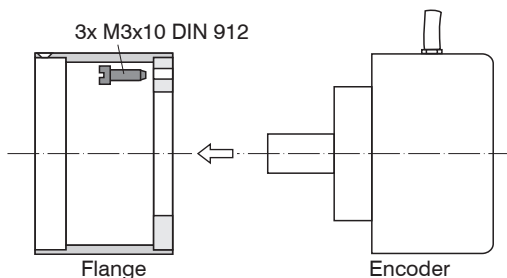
Mounting of adapter flange and encoder, Series WDS-Z60 Fig. 7 Mounting of adapter flange and encoder, Series WDS-Pxxx
